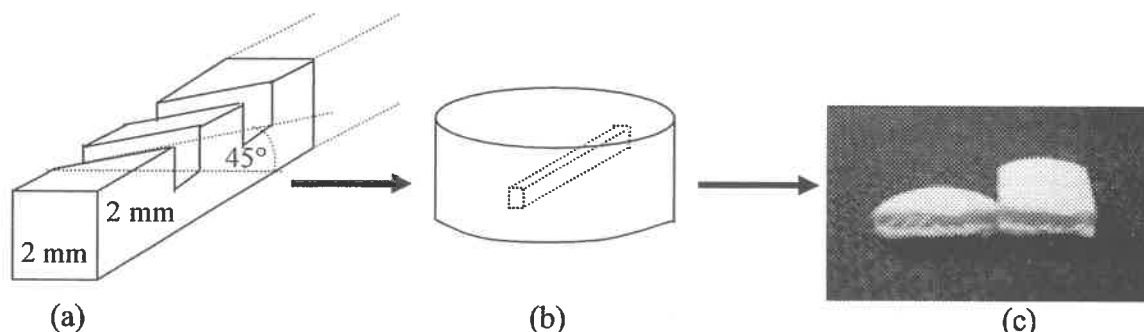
(a) EDMed and machined Graphite; (b) Graphite embedded in powder bed and compacted and (c) Final sintered product fractured to reveal the details.
